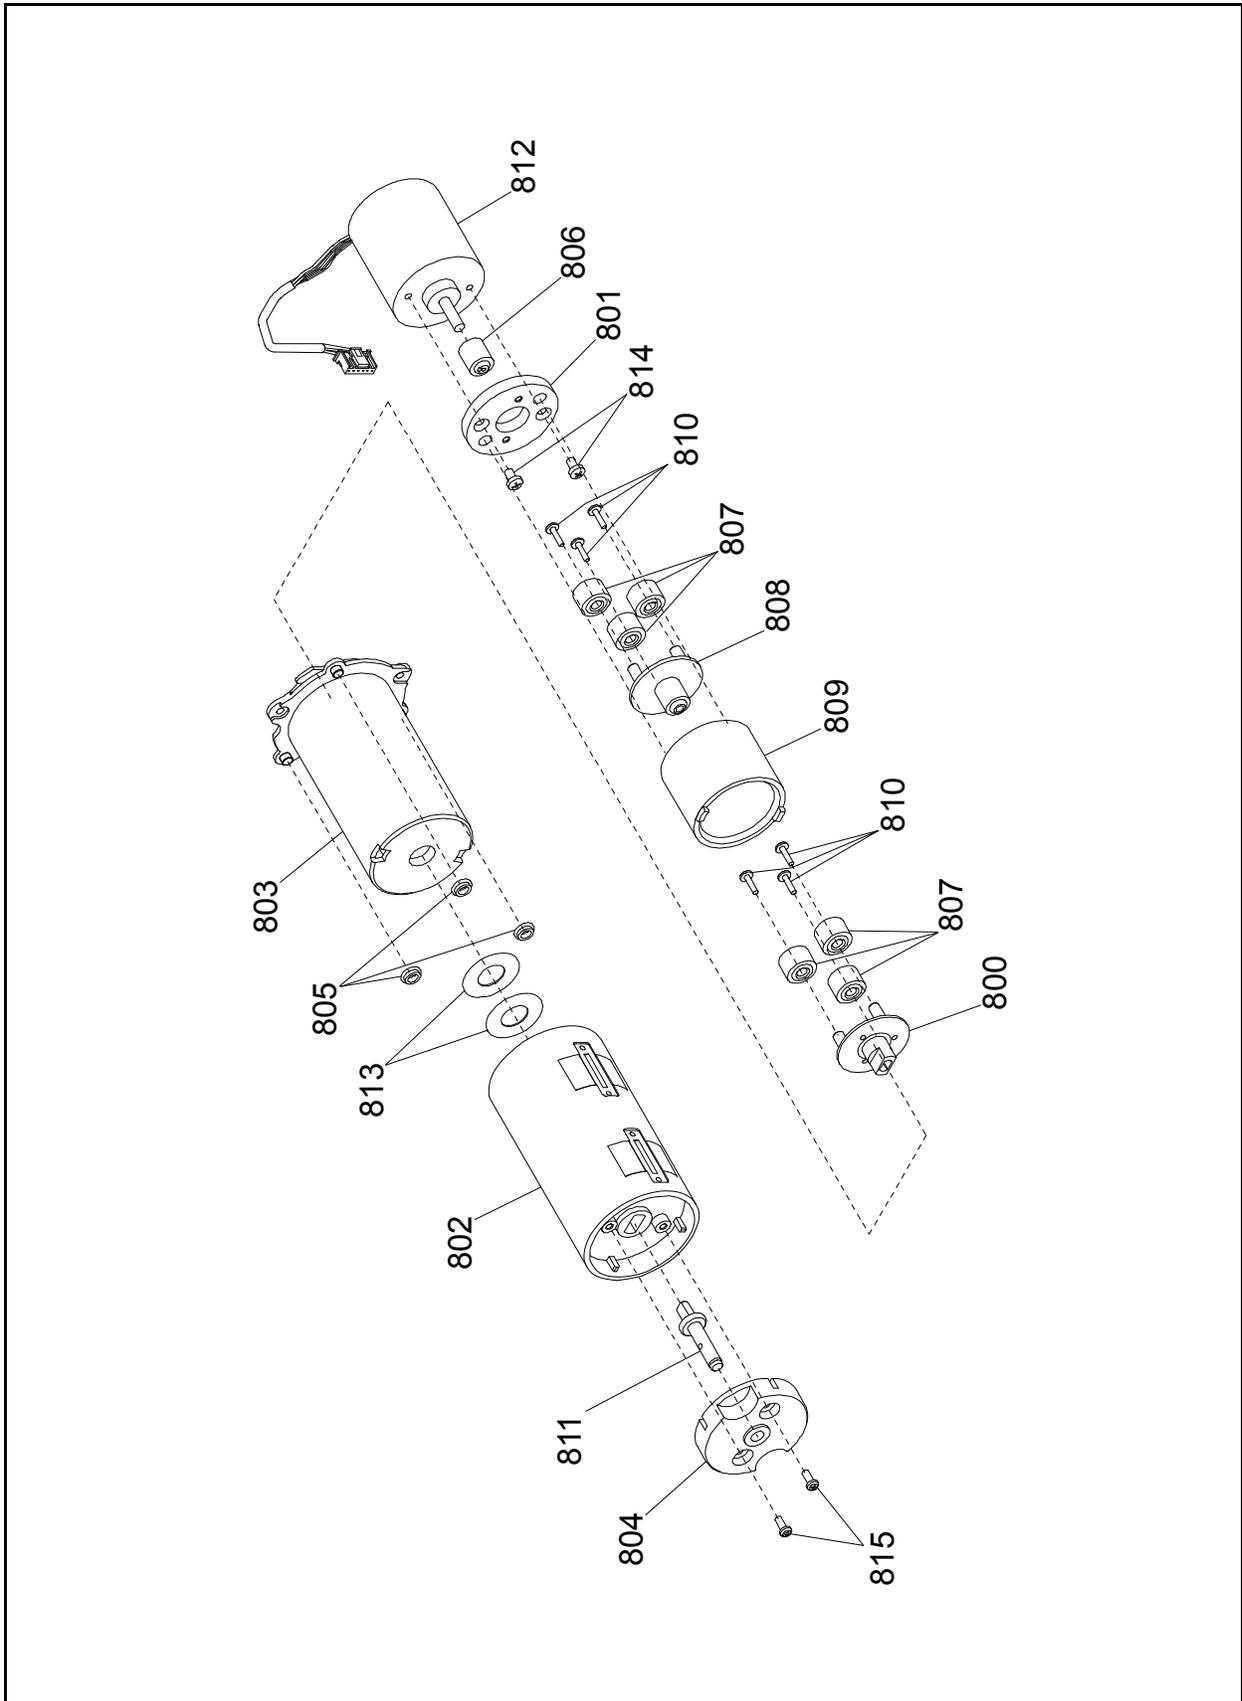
VEGA-RC Twin Upper and Lower Drum Unit Exploded View
